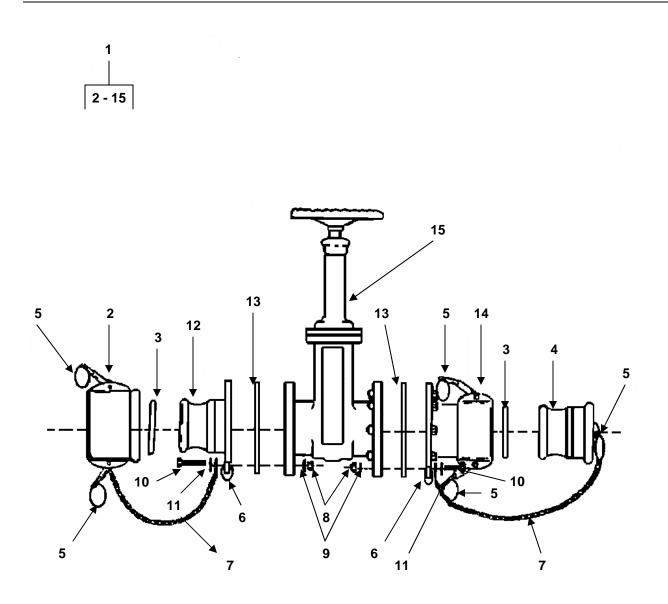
Gate Valve Assembly (Sheet 1 of 2)
